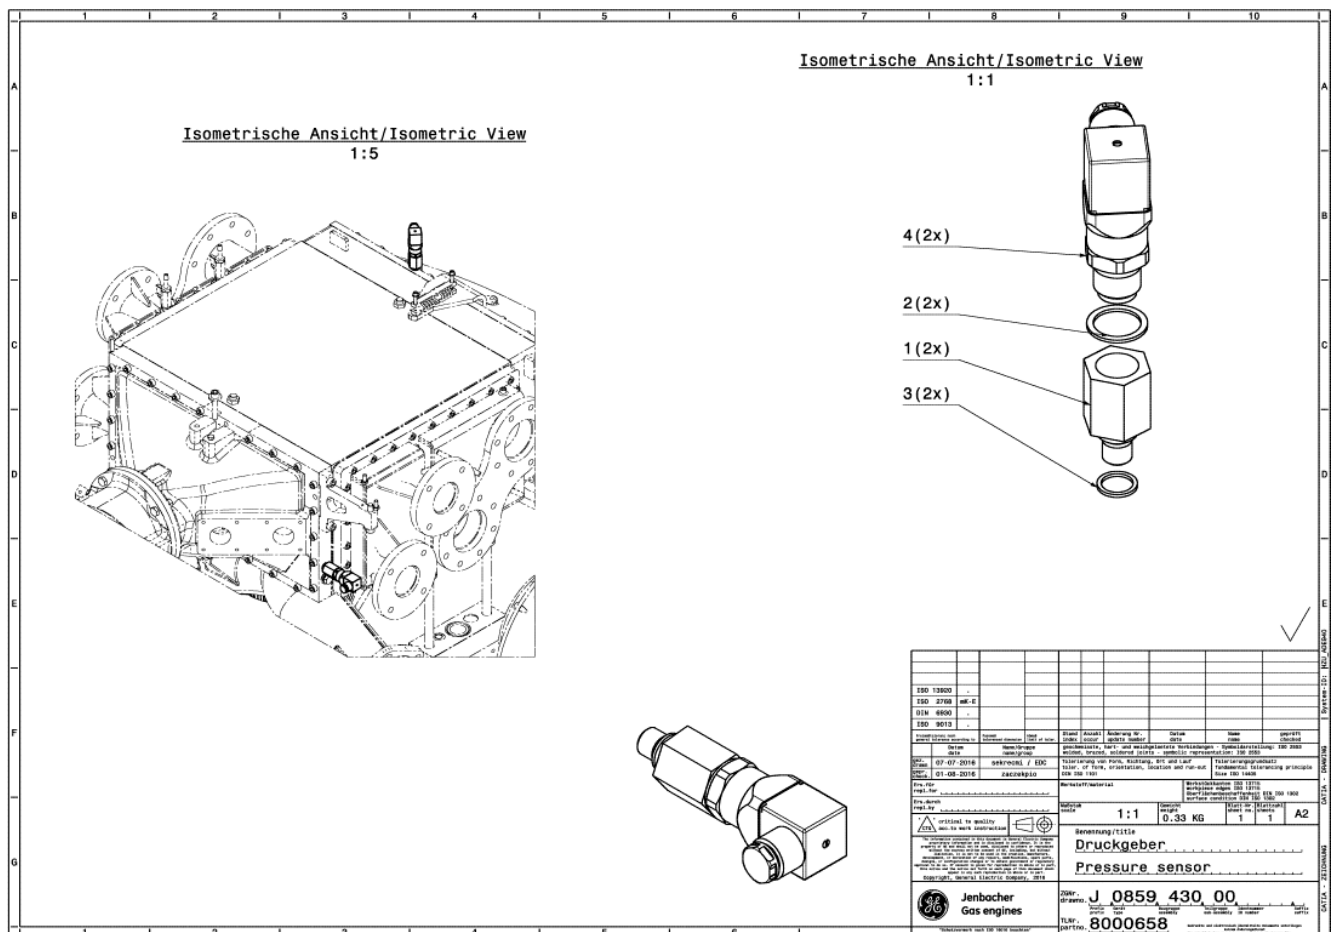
Drawing - mixture cooler differential pressure module - TL8000658
